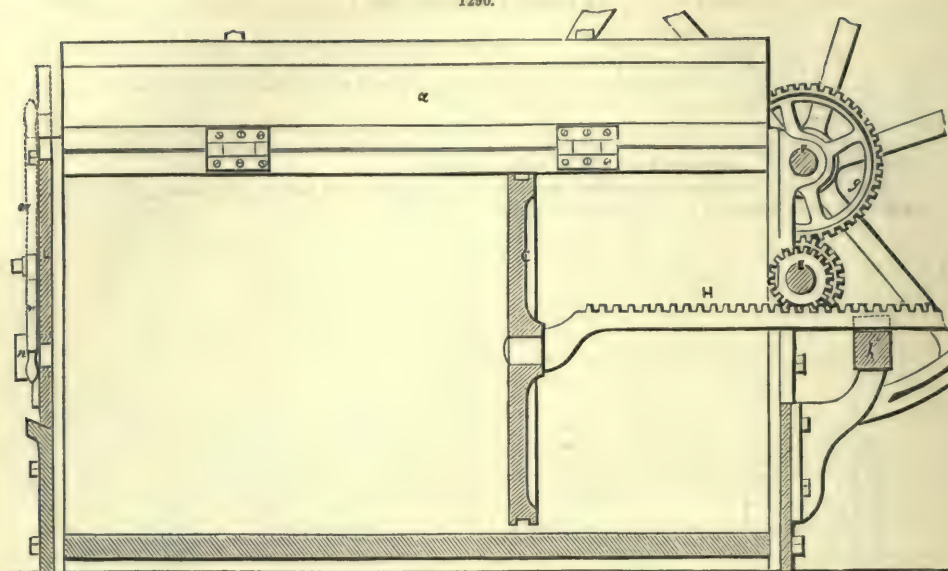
is a side elevation of this machine, which exhibits the arrangement of the one usually employed; Fig. 1287 represents a plan of the same with the dusting-box removed; while Figs. 1288 to 1292 represent some of the parts detached.
